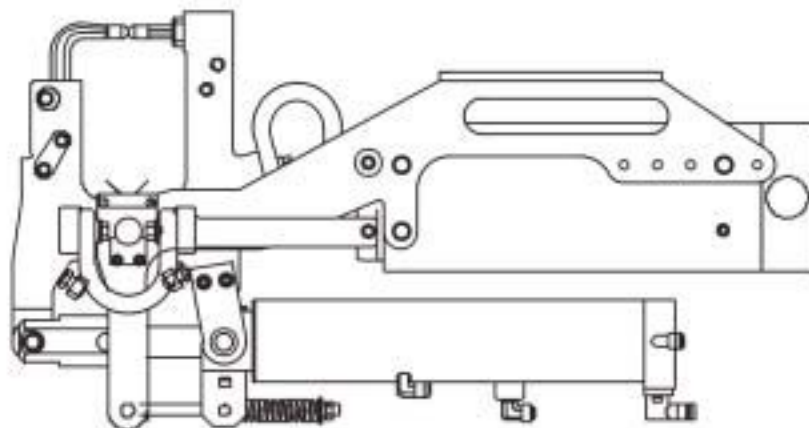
Fixture Style, Scissor-Type Gun w/Transformer
